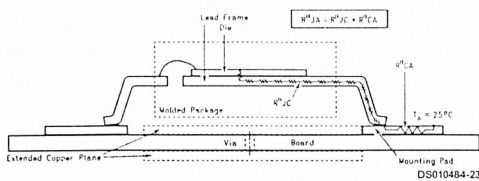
Cross-sectional view of Integrated Circuit Mounted on a printed circuit board. Note that the case temperature is measured at the point where the leads contact with the mounting pad surface
